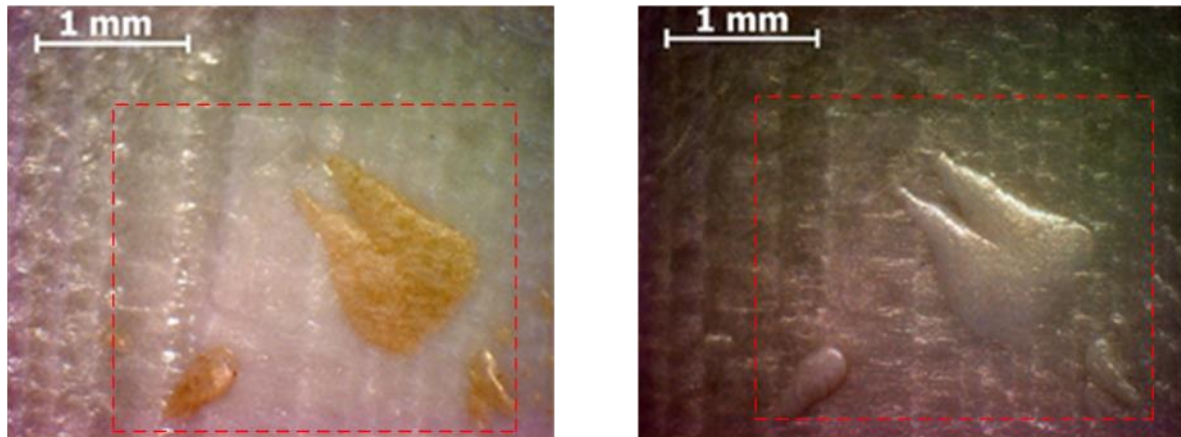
(a) Surface scalding patch attached to the part in shot 12 (b) Protrusion moulded in a similar area, shape and size because of the surface scalding, in shot 13. Scalded tool material has adhered to the part in (a), and hence the tool has lost material.
